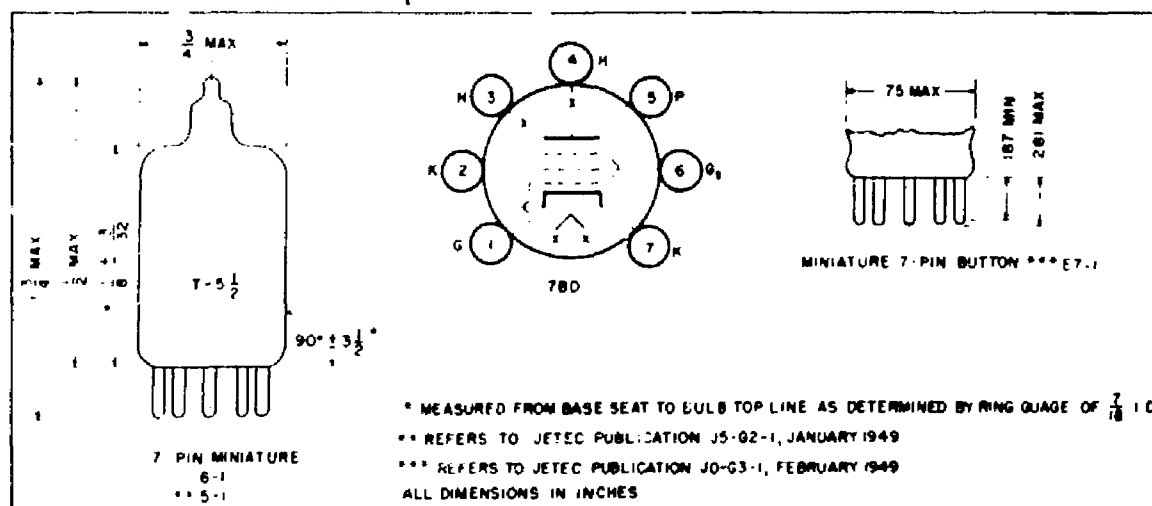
Outline Drawing and Base Diagram of Tube Type JAN-5654/6AK5W
